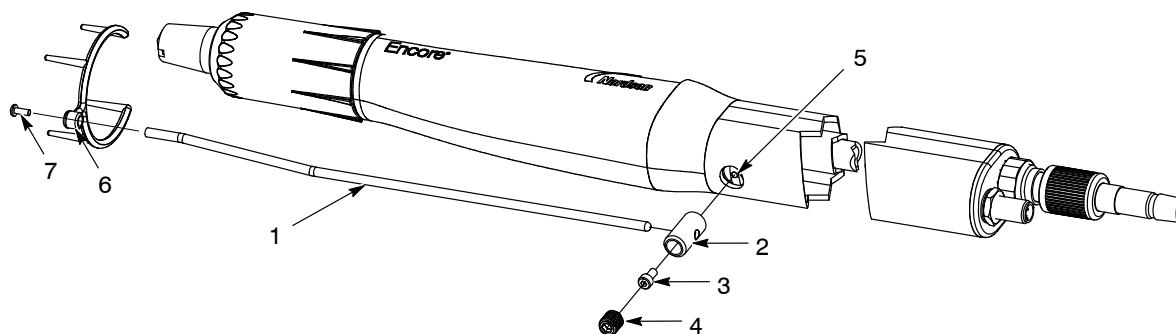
Ion Collector Installation - Tube-Mount Spray Gun
